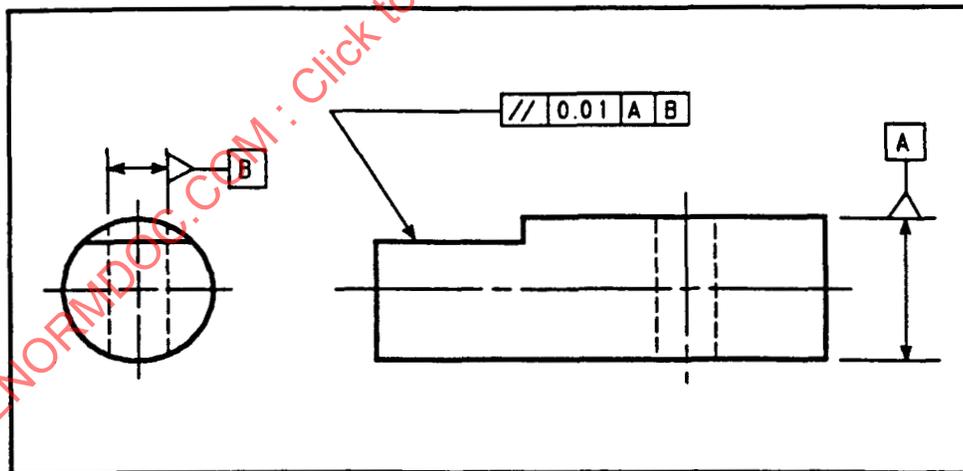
PLANAR PARALLELISM OF A PLANE; PRIMARY DATUM AXIS; SECONDARY DATUM PLANE CONTROLS ROTATION OF THE TOLERANCE ZONE ABOUT THE PRIMARY DATUM AXIS
